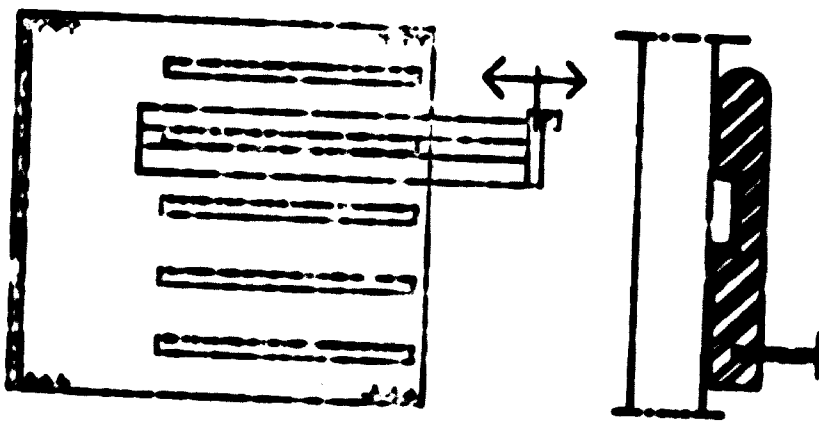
Side panel of drawer unit with sliding strips. Thick lines indicate edges which are guided by assembly jig.
